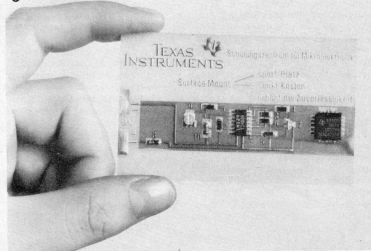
A surface-mounted board has a different appearance than a conventional PCB. This sample board houses a simple flashing-light circuit.
